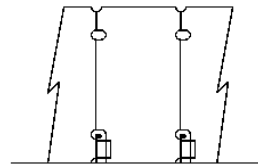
Block assembly methods 3-1e and 3-1f [2], [30]
